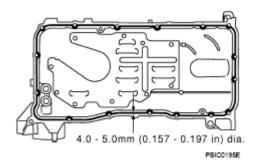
Applying Liquid Gasket To Cylinder Block Mating Surfaces Of Oil Pan
